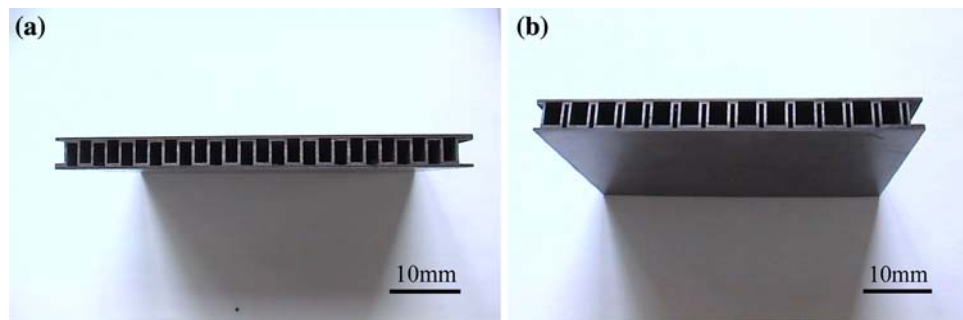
Photographs of steel sandwich cooling panels (a) specimen 1 and (b) specimen 2
